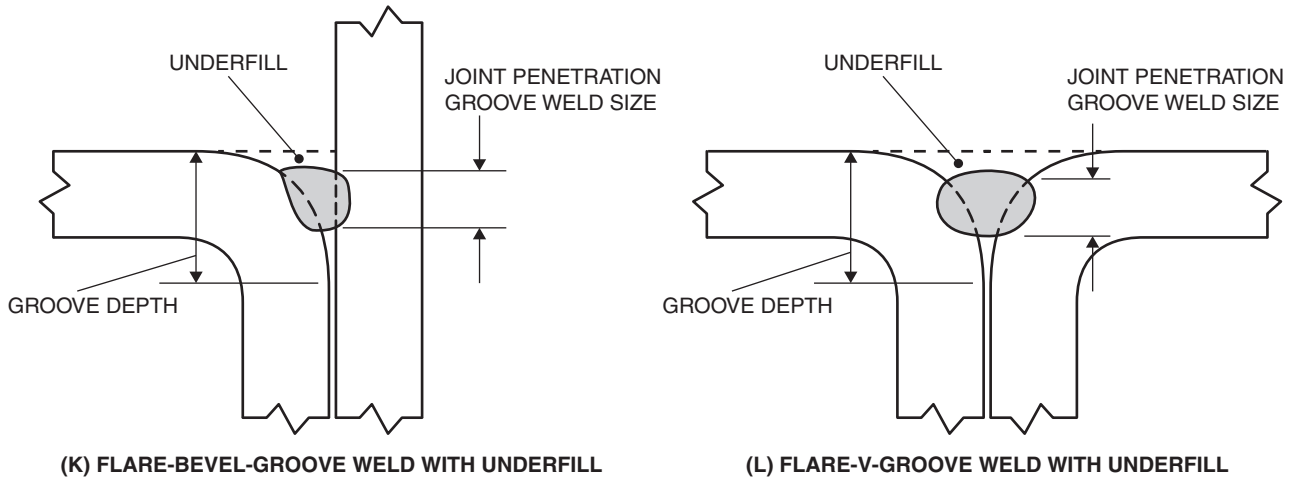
(Continued)—Groove Weld Size and Joint Penetration
